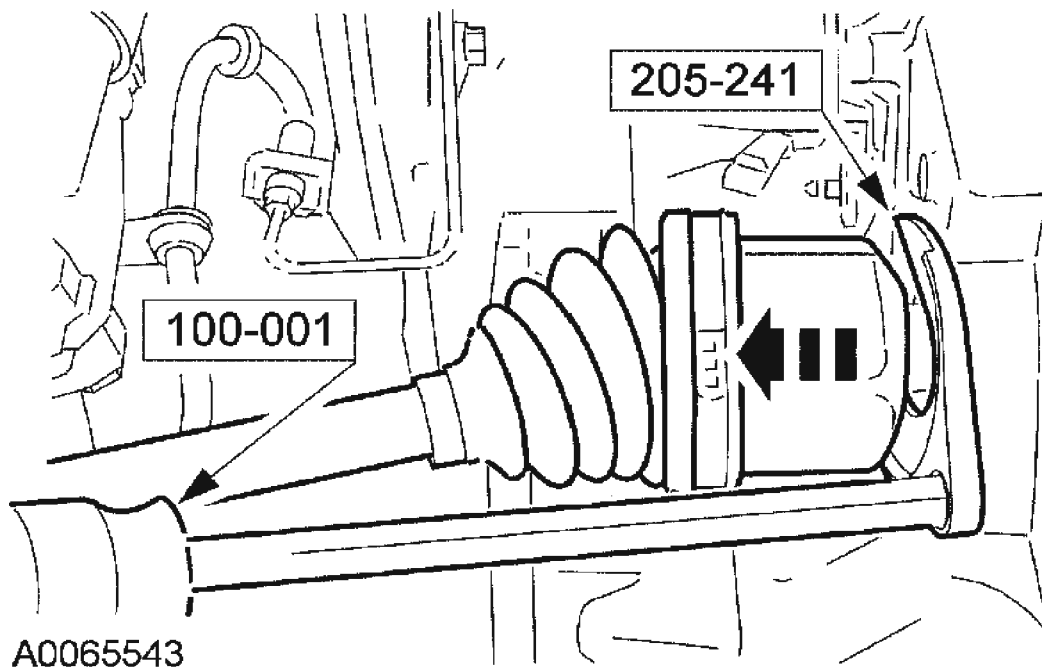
Removing Halfshaft From Transaxle Using Special Tool
